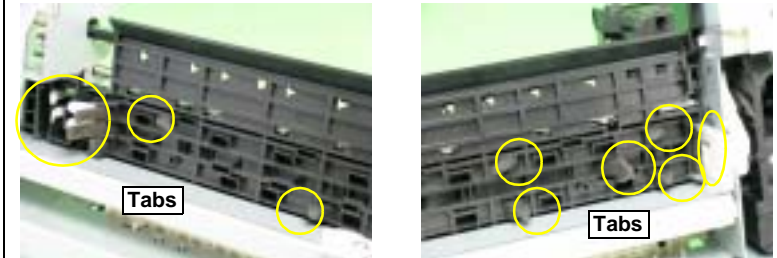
Reinstalling the Front Paper Guide Pad (1)
